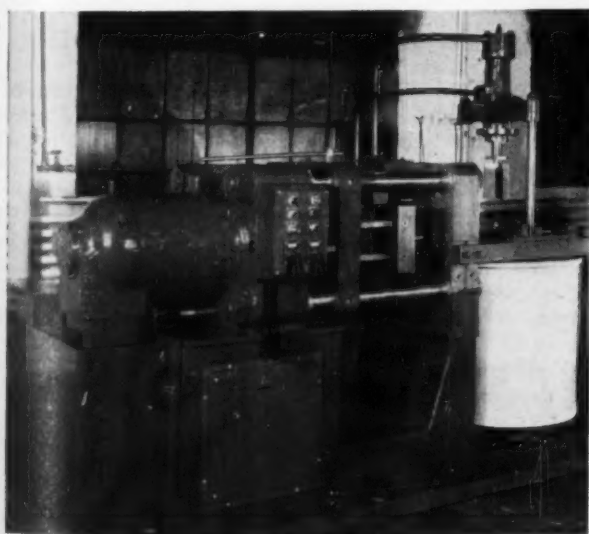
SMALL ZINC-DIE-CASTING MACHINE
